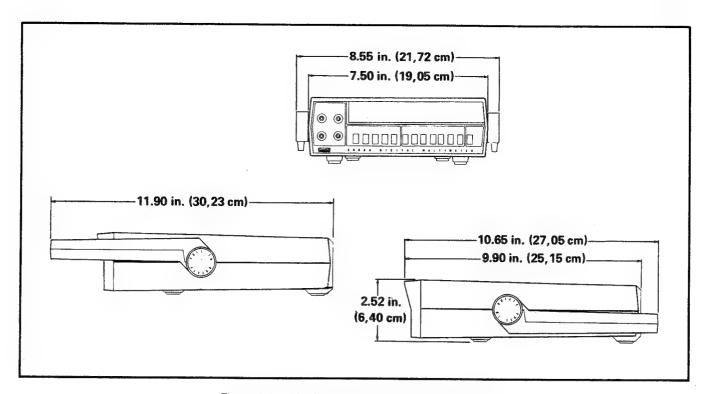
MODEL 8600A OUTLINE DRAWING
